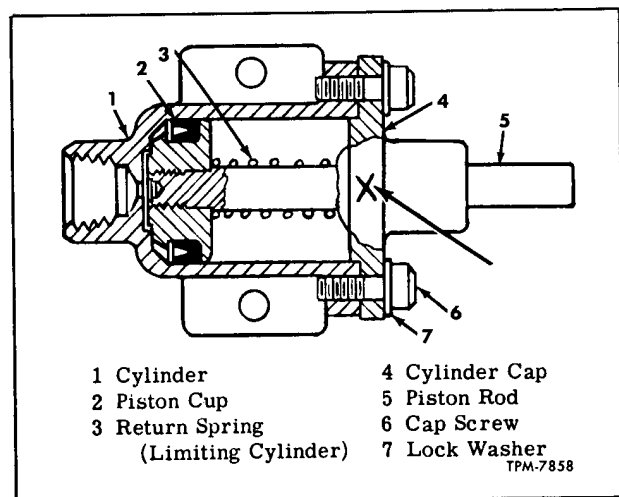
Engine Stop and Fast Idle Limiting Air Cylinder
